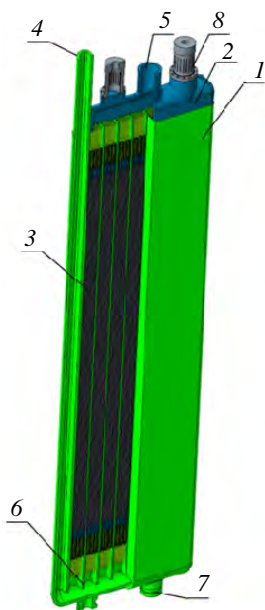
General view of AC of DEMO-FNS hybrid blanket: 1 — AC case; 2 — cover of the AC case; 3 — fuel assembly with fuel rods from MA; 4 — inlet coolant pipe; 5 — outlet coolant branch pipe; 6 — inter-channel partition; 7 — the counterpart of the collet fastening of the AC to the VV; 8 — flexible mechanical supports
